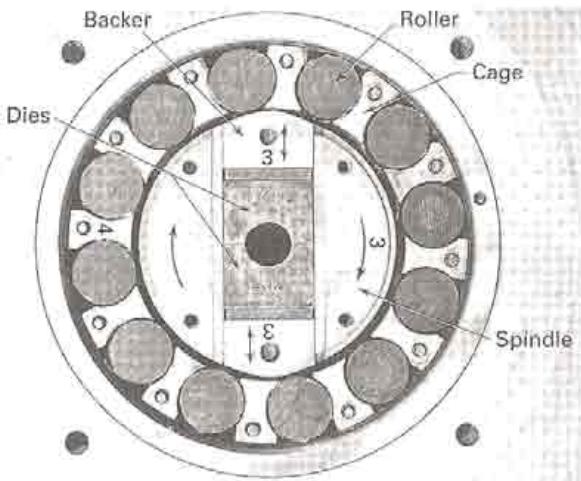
Basic components and motions of a rotary swaging machine. (Note: The cover plate has been removed to reveal the interior workings.) (Courtesy of the Timken Company, Canton, OH.)
